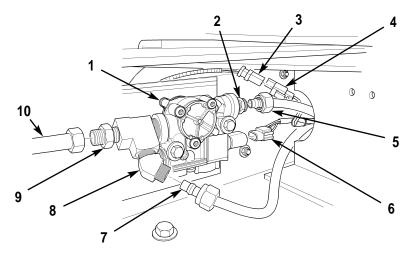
Connecting Rear Wheel Sensor and Modulator.
